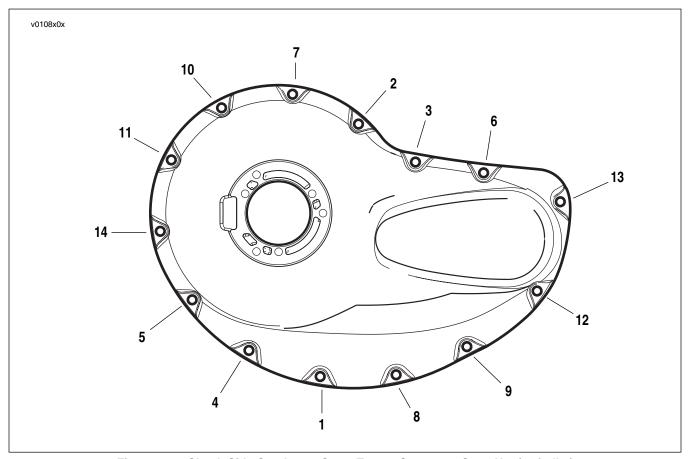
Clutch Side Crankcase Cover Torque Sequence @ 9.7 Nm (86 in-lbs)
